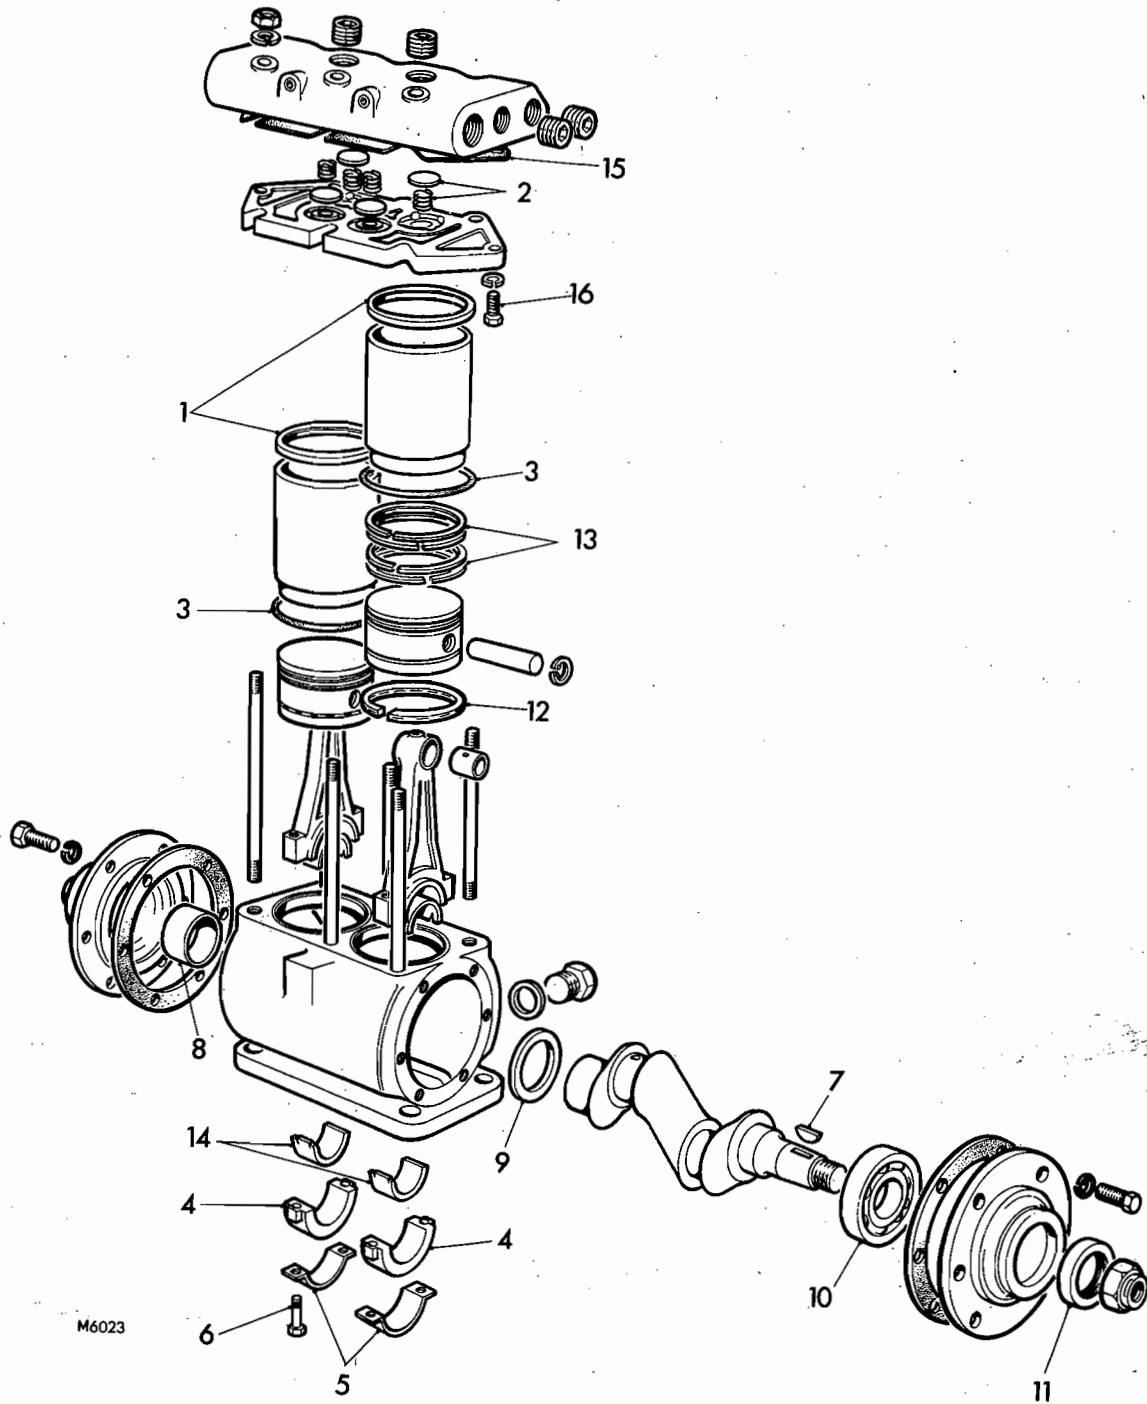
EXPLODED VIEW OF COMPRESSOR
